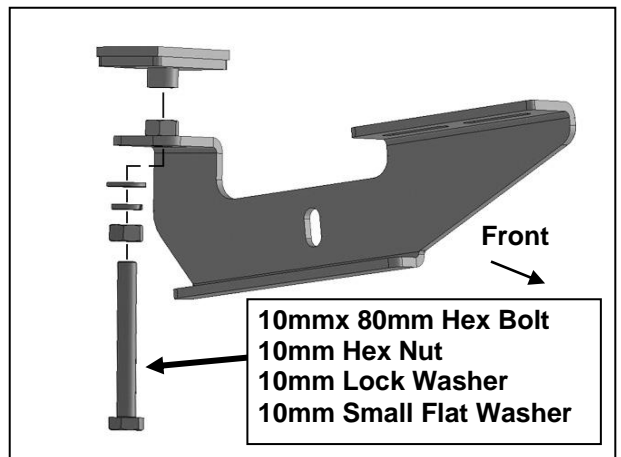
A) Attach passenger/right center Support Bracket to Spiral Bolts
